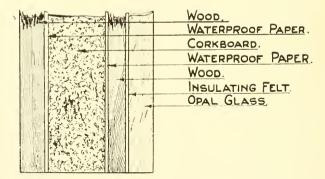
TYPICAL REFRIGERATOR WALL CONSTRUCTION
